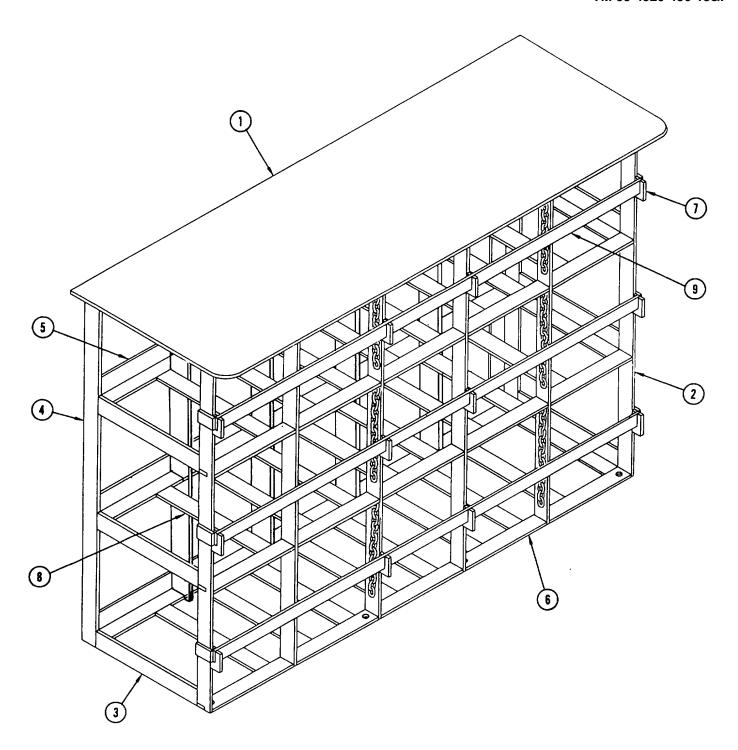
Tool Box Rack (15 Unit) Part No. 20083267-3 (Sheet 1 of 10)
